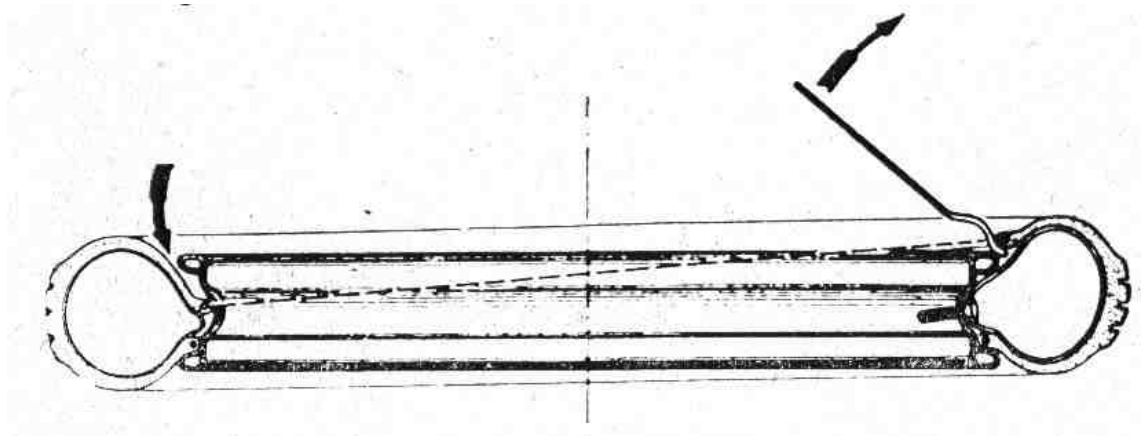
Sectional view of rim and tyre – tyre fitting
